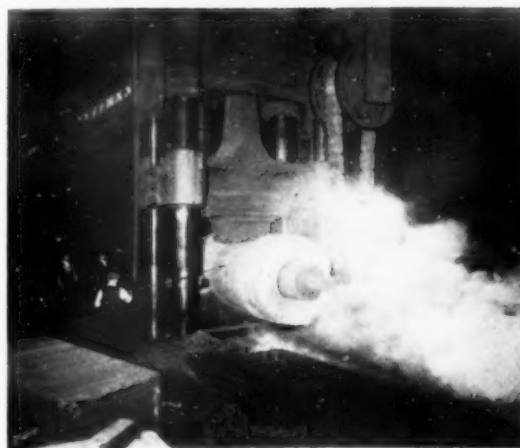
Rough-forging a billet after piercing a hole 28 in. dia.
